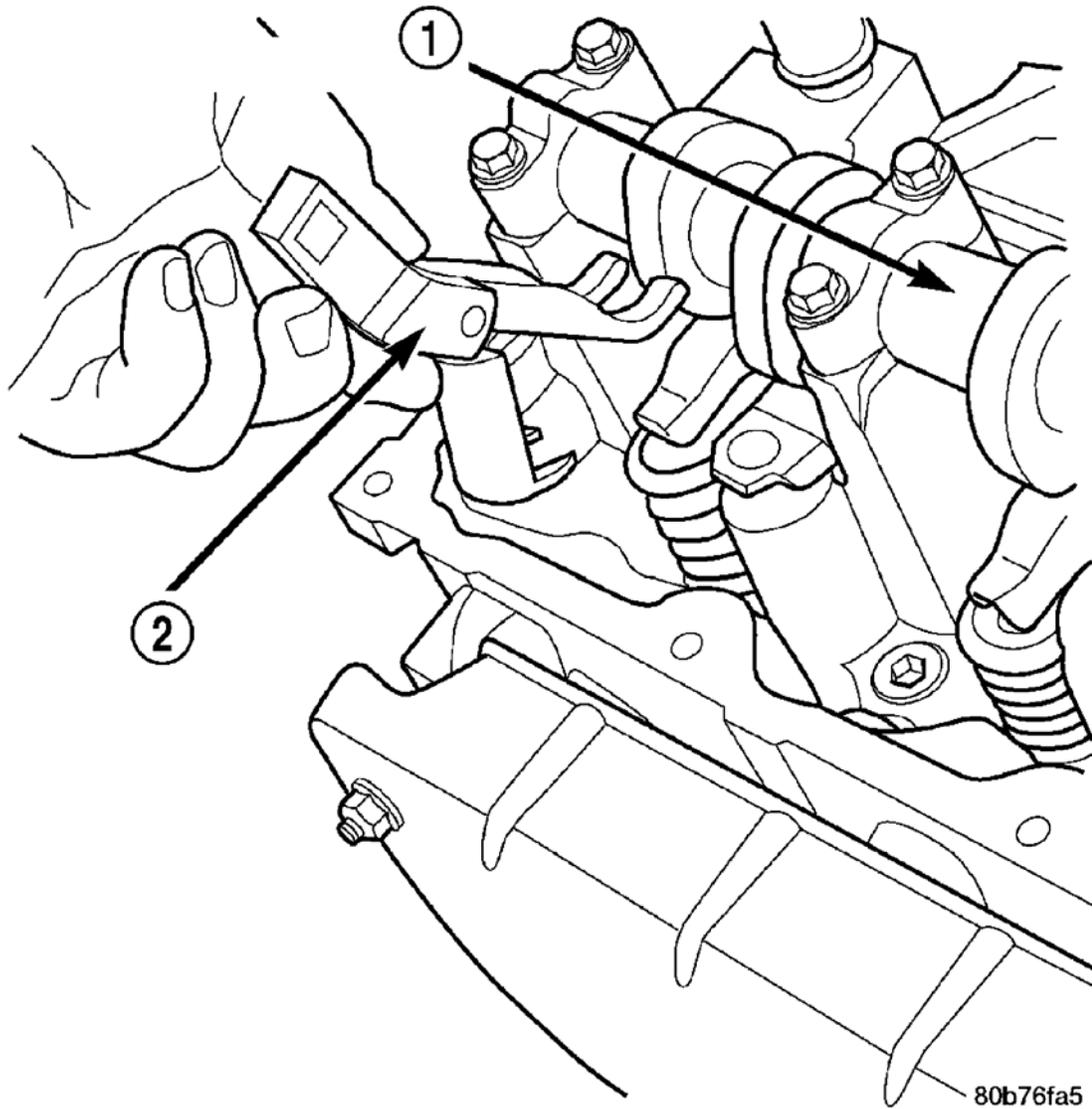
Removing/Installing Camshaft & Special Tool 8516
